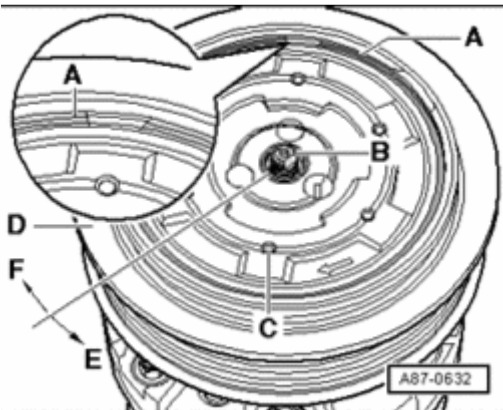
Identifying Drive Plate, Circlip, And Pulley
